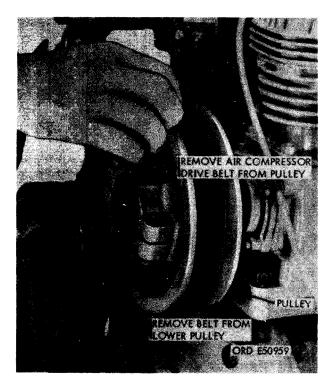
REMOVING OR INSTALLING AIR COMPRESSOR DRIVE BELT.
